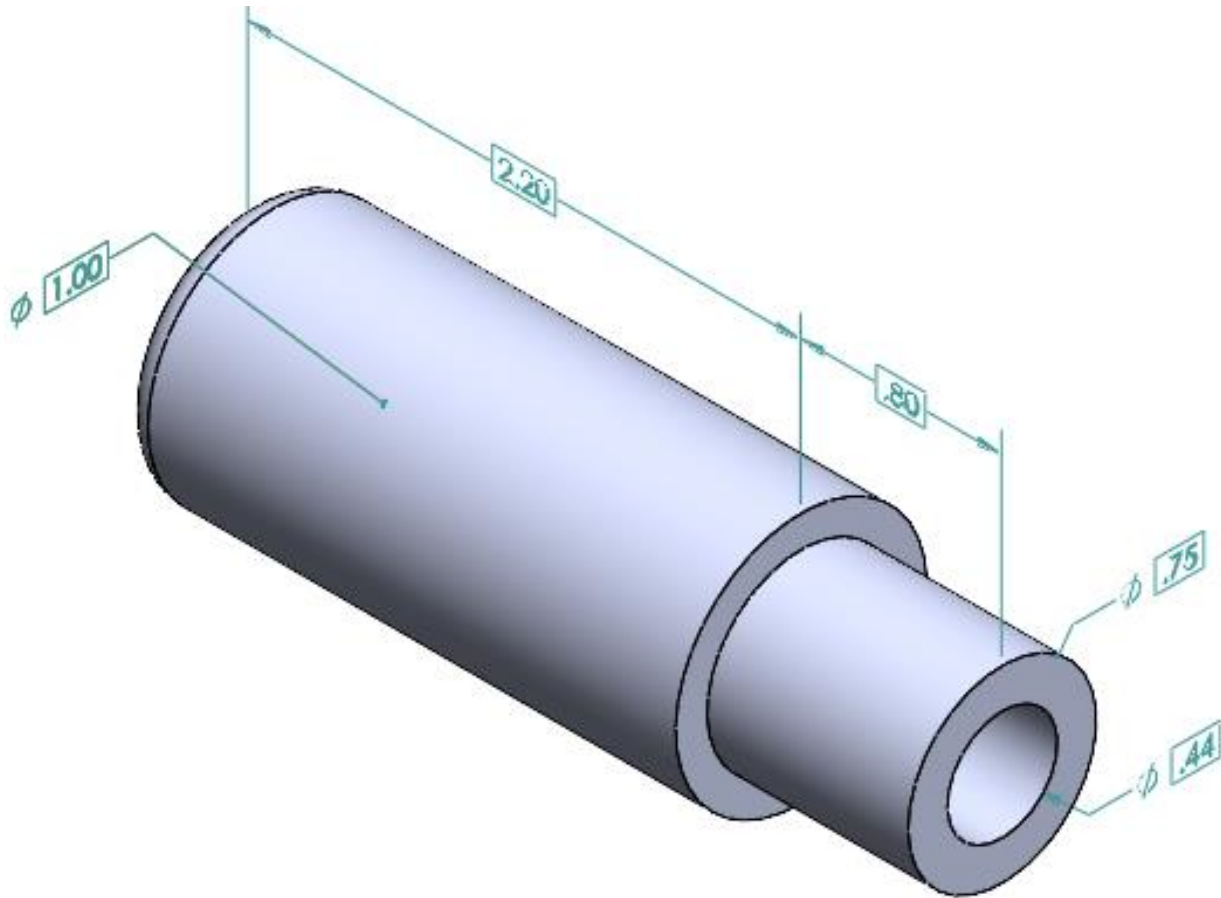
DIMENSIONED ISOMETRIC VIEW OF THE SHELF-CHAIN CONNECTION SLEEVE.
